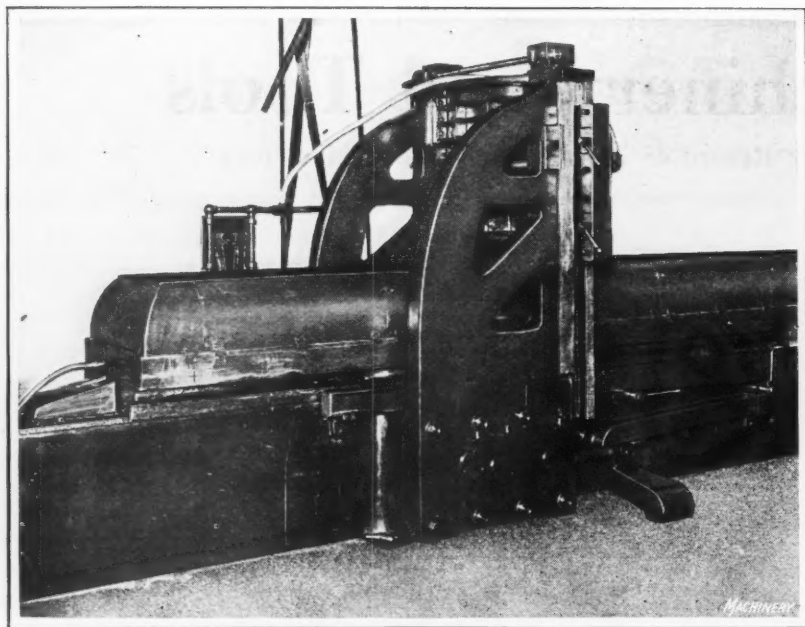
Rear View of the Planer-type Grinding Machine, showing Method of conveying the Cutting Compound back to the Supply Tank
